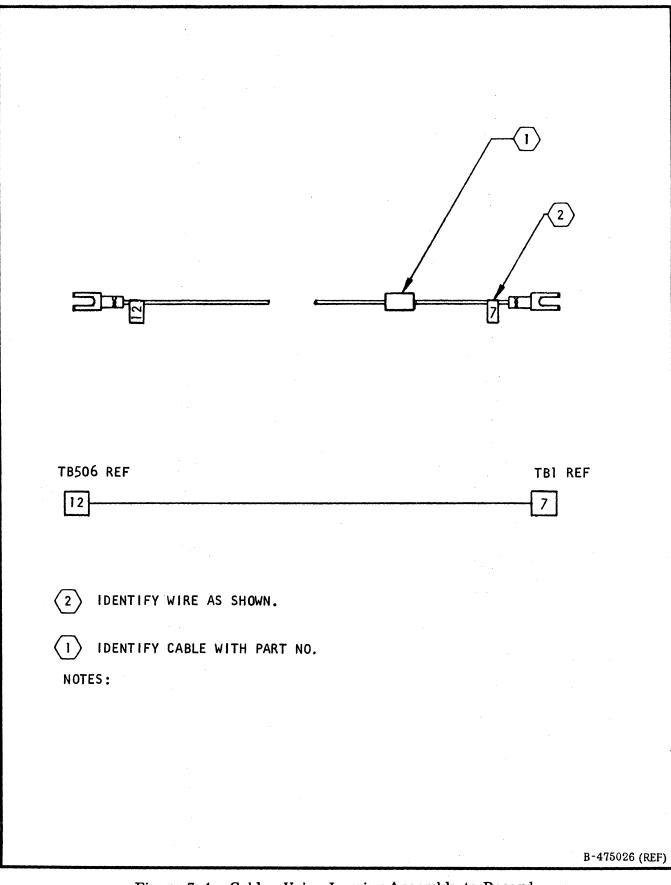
Cable, Voice Logging Assembly to Record Head Driver Amplifier Housing
